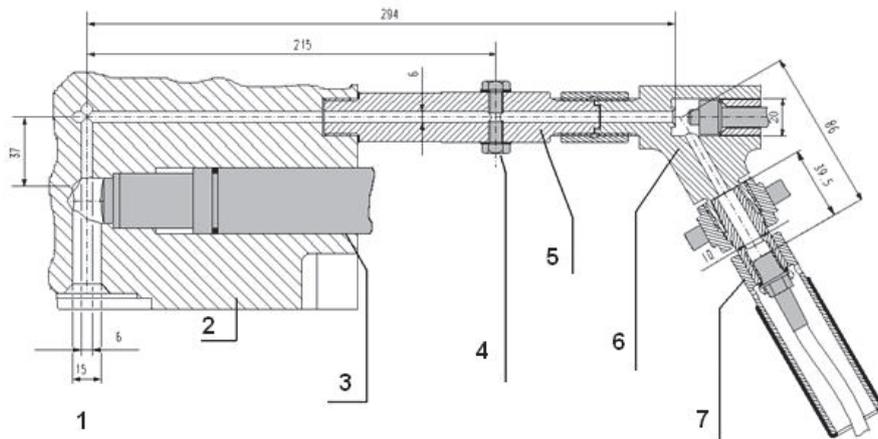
The SULZER diesel engine type 6AL20/24 indicating channel (1- combustion chamber, 2-cylinder head, 3-starting valve channel, 4- screws added to chocking/throttling gas stream during the experiment tests, 5-union piece, 6- indicating valve, 7- Thompson adapter with pressure sensor)
